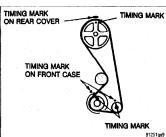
Camshaft and crankshaft sprocket alignment for proper timing belt replacement—1.8L and 2.0L SOHC engines
